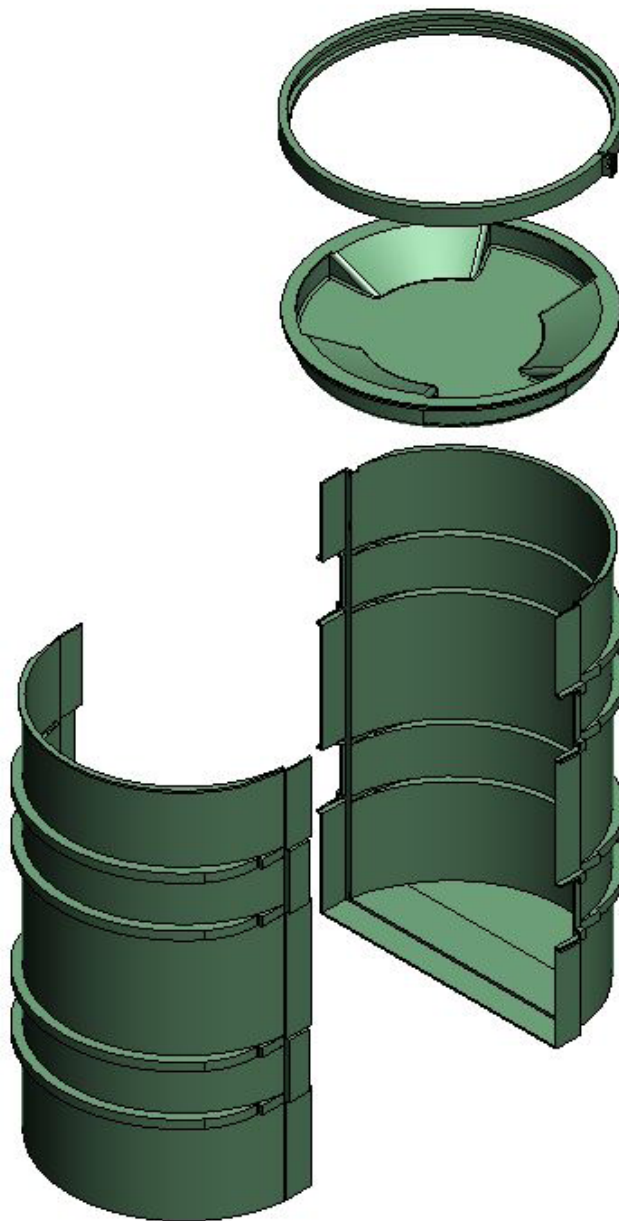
Exploded view of without hinge concept. The external ring is a separate component, which is only positioned when the drum is filled with juice.
